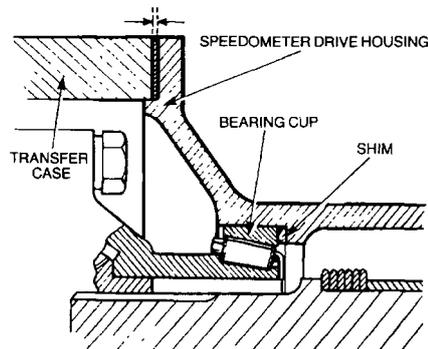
Intermediate Gear Assembly Pre-load Adjustment
